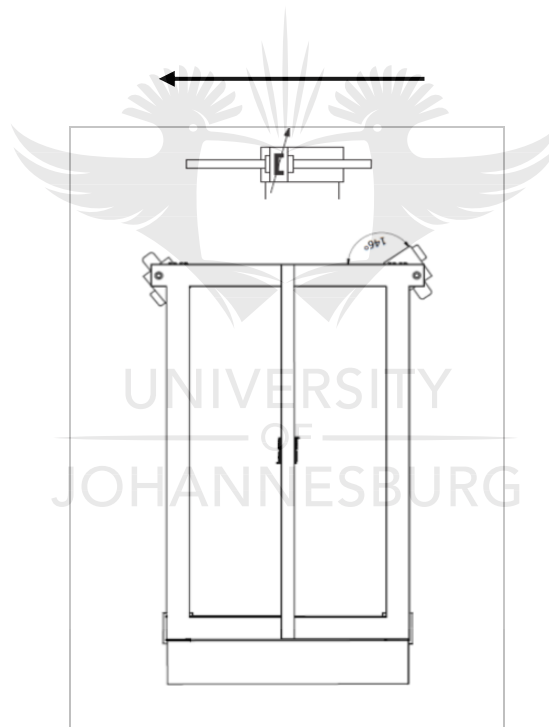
Steering Illustration of Main Frame Structure - Top View
